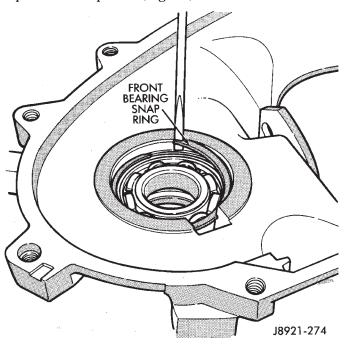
Front Output Shaft Front Bearing Snap Ring Removal
